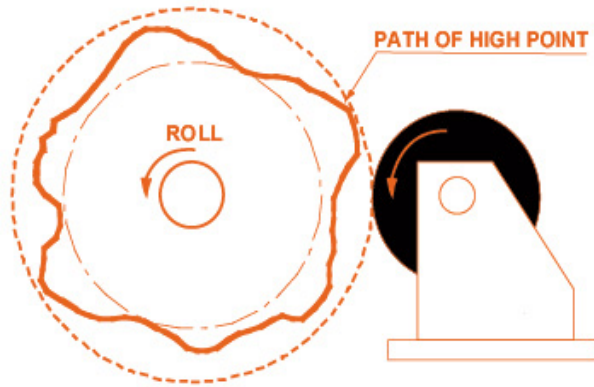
A. Roll grinding principle – a single wheel roll grinder.
